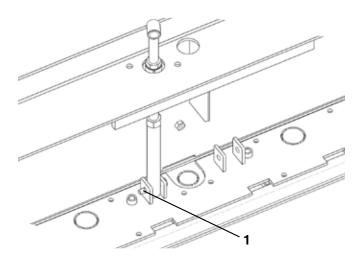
Wear Plate Shoulder Bolts 1 - Adjuster Screw Shoulder Bolt
